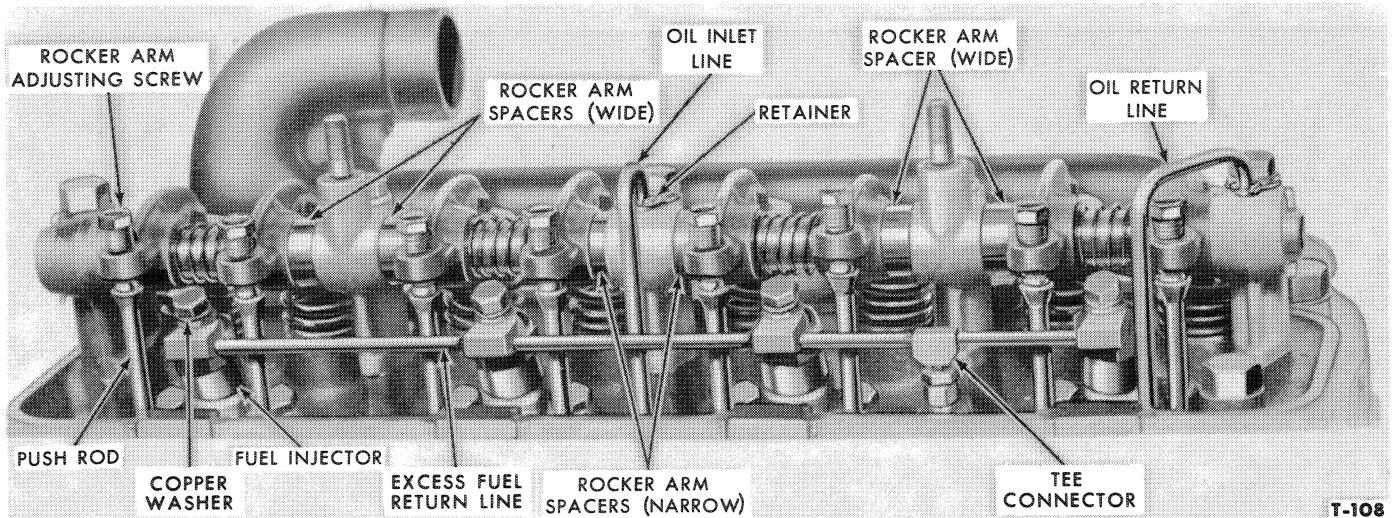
Diesel Engine With Rocker Arm Cover Removed
